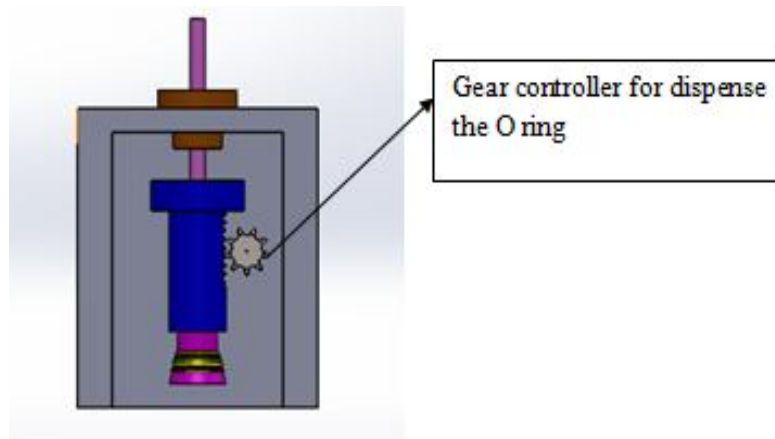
O- ring dispenser unit through the gear control: (concept 4)
